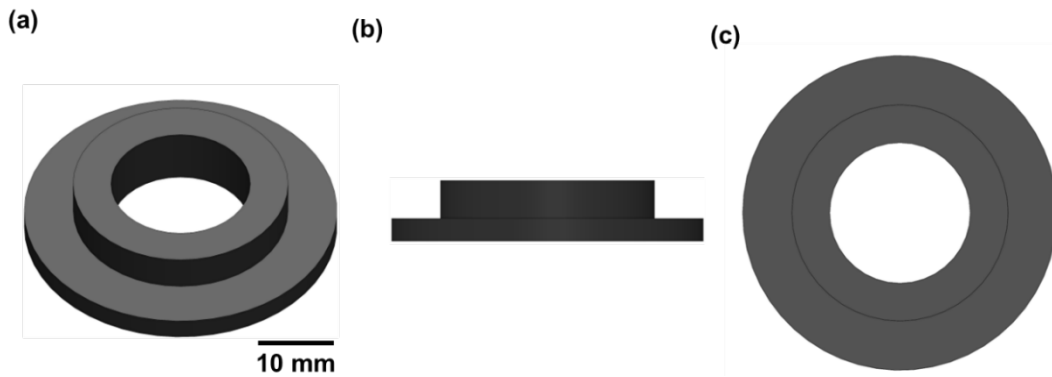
Model of the gladhand seal taken from the vehicle (a) angled view, (b) side view, and (c) top view.
